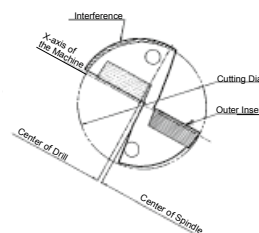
Excessive offset (For Smaller Hole Diameter)
